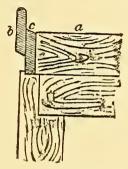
Section through the cutting edge of table shown in Fig. 19.
